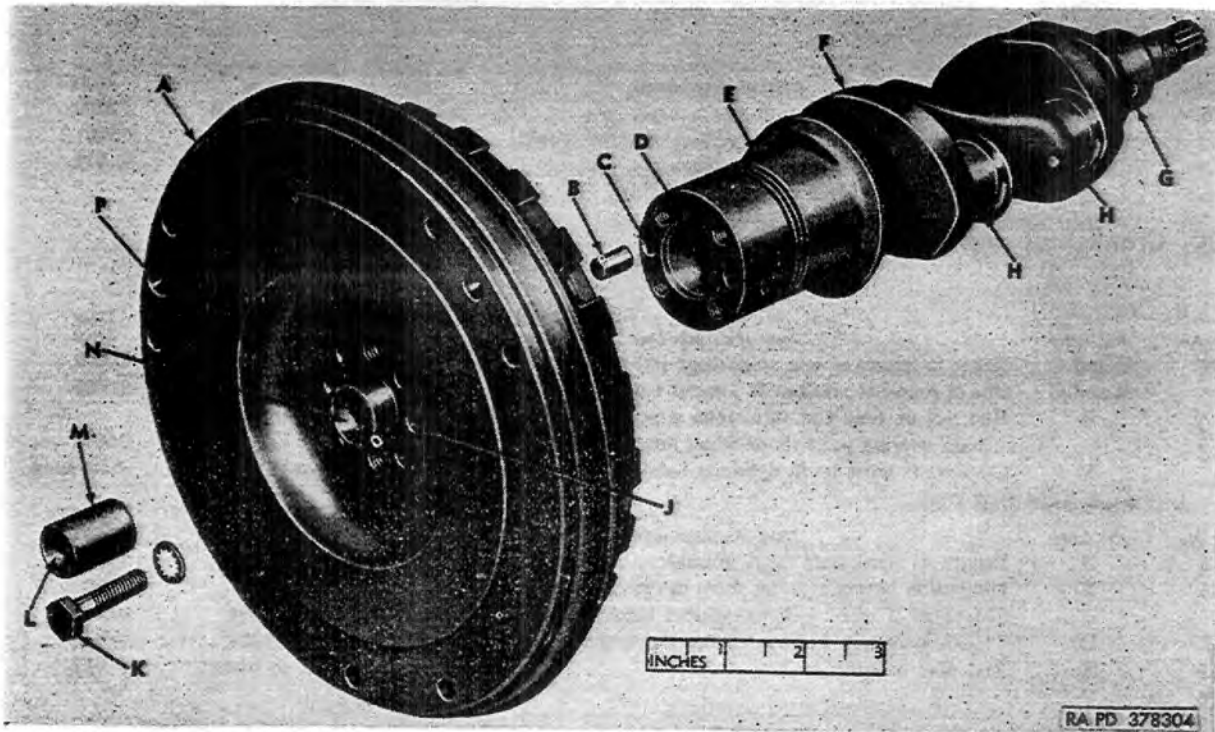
Repair and rebuild standard points of measurement for crankshaft and flywheel.
